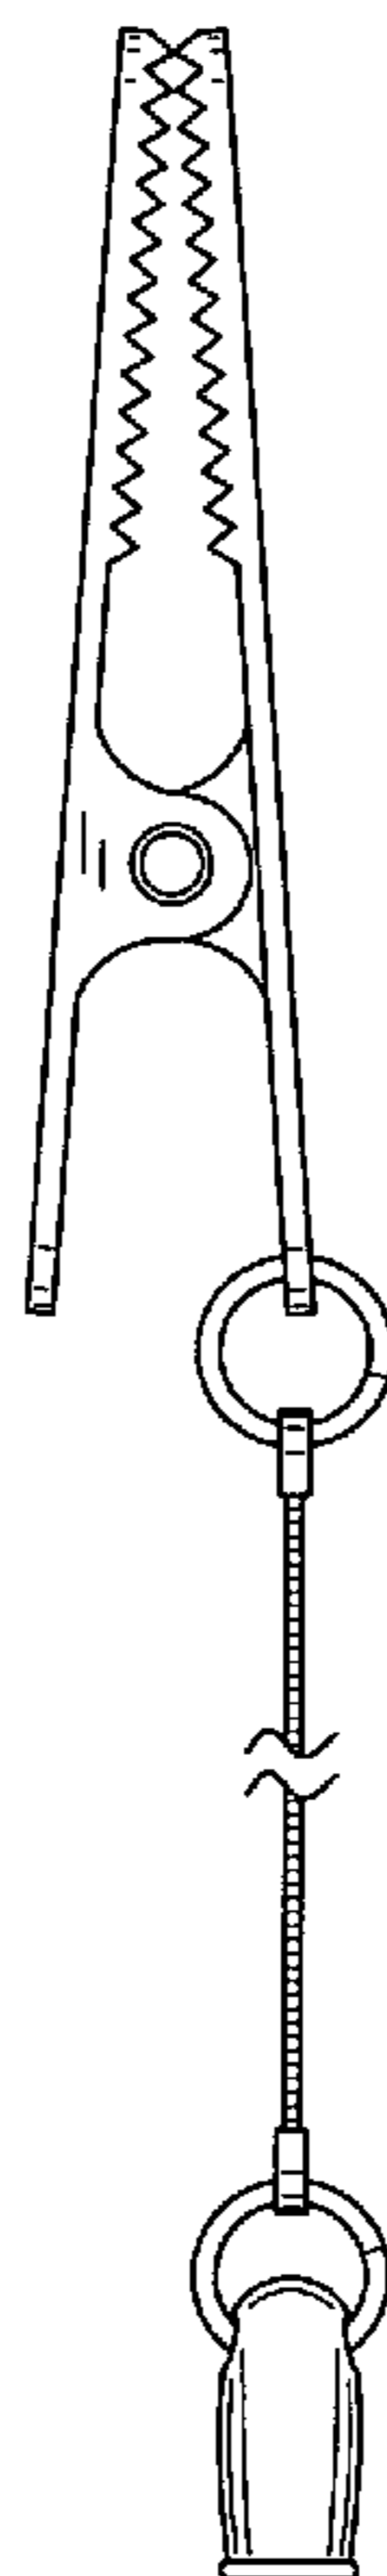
is a right side elevation view of the crochet needle holding apparatus; and,
